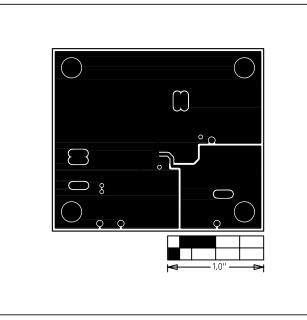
MAX15040 EV Kit PCB Layout—Inner Layer 2
